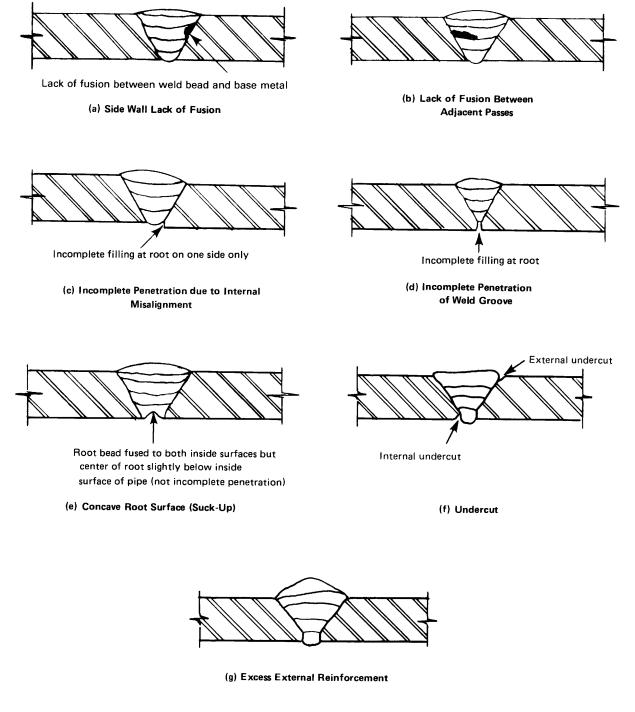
TYPICAL WELD IMPERFECTIONS
